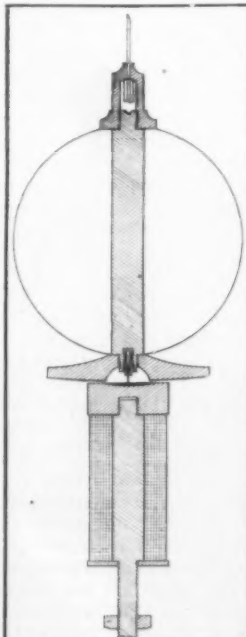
Vertical section showing shaft through the ball from which a pointed brush dips into ink-pool at top of electro-magnet.
